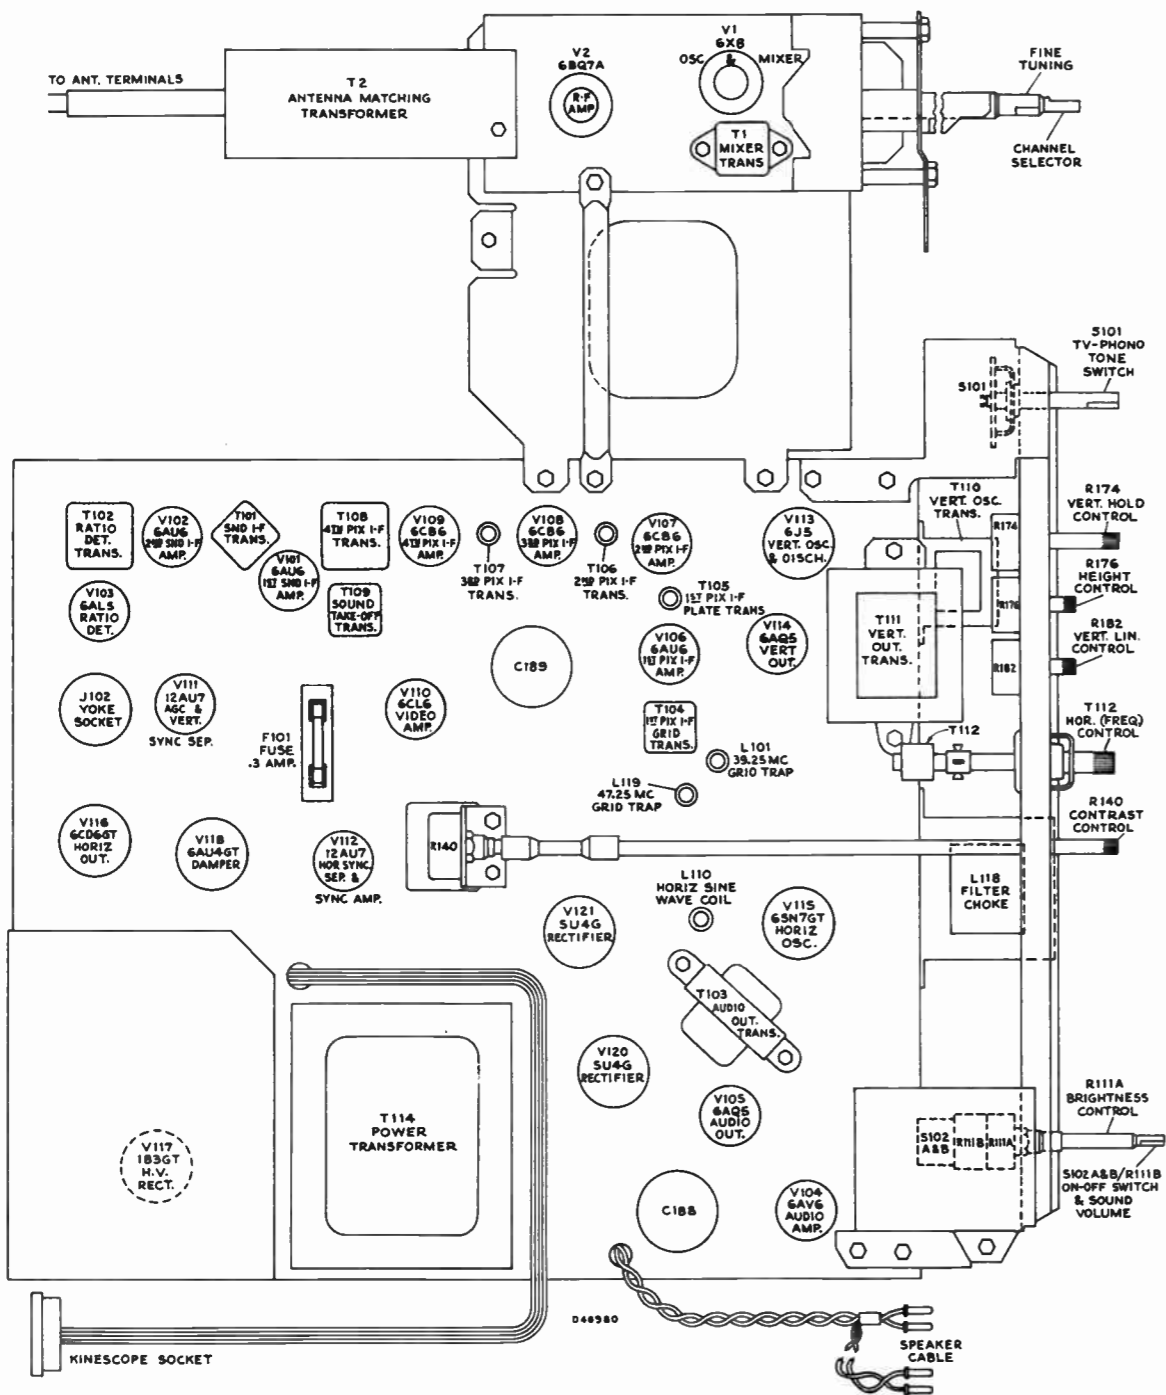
Chassis Top View (shown with KRK22D Tuner)
